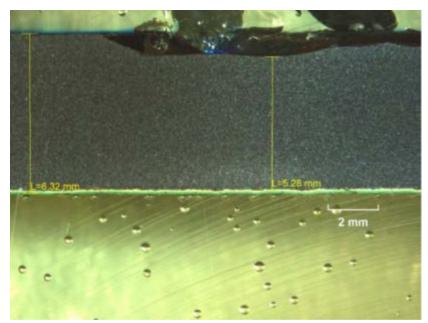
Cross Section of Coupon 1 at Area of Maximum Wall Loss
